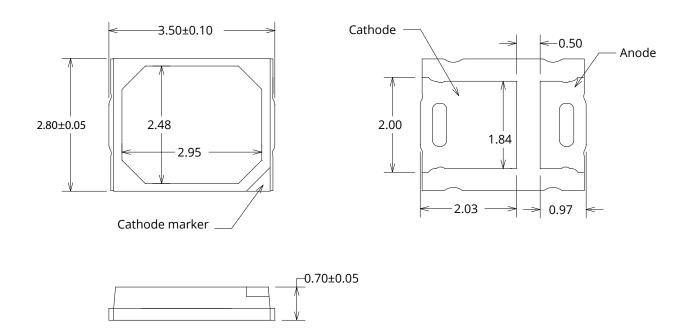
Mechanical dimensions for LUXEON 2835 Line.
